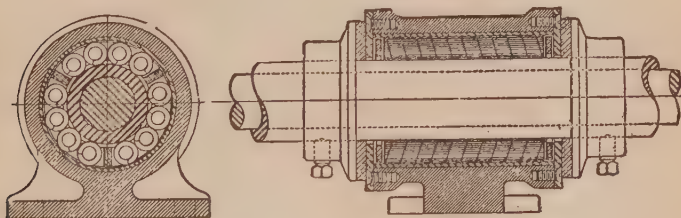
The "Hyatt" flexible roller bearing; this consists of strips of steel rolled into coiled springs, forming a strong, though elastic support, and capable of taking some end thrust.
